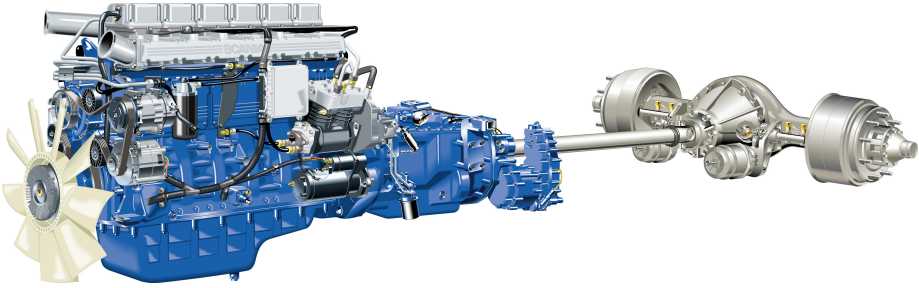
A rear-wheel-drive driveline from a Scania truck. The engine, transmission, propeller shaft, differential (final drive), and drive shafts can be seen.
